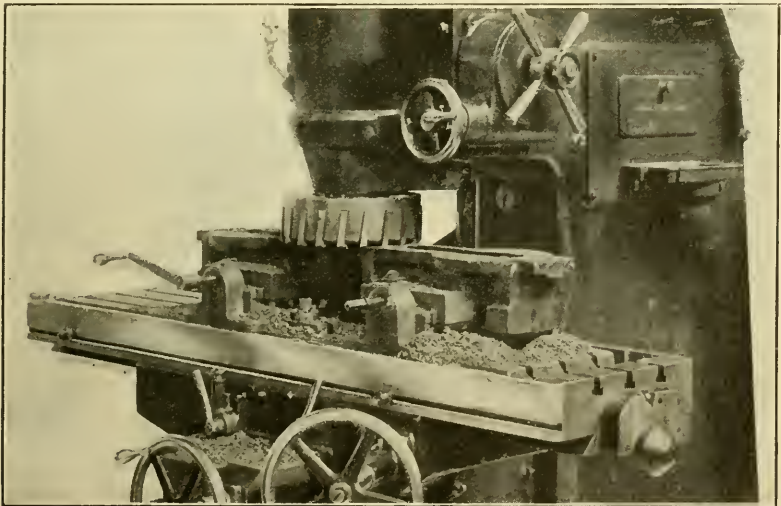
HIGH-POWER FACE MILL ROUGHING BOTTOMS OF VISE BODIES. ONE PIECE IS CHUCKED WHILE THE OTHER IS MILLING
